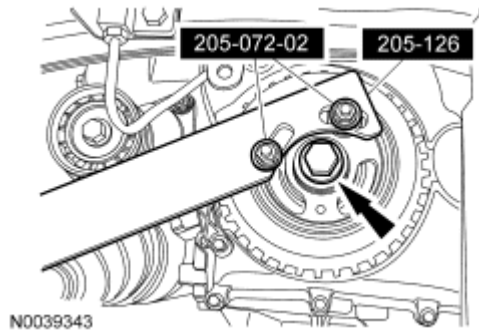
Assembling Special Tools (205-126 And 205-072-02)
